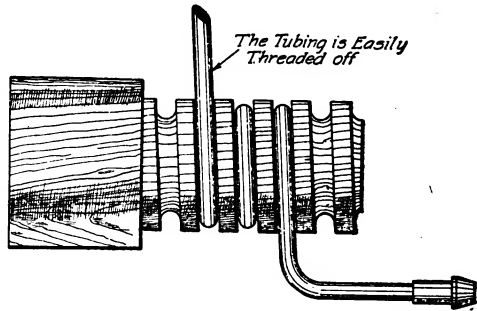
Hard Wood Fixture for Bending Oil Pipe
